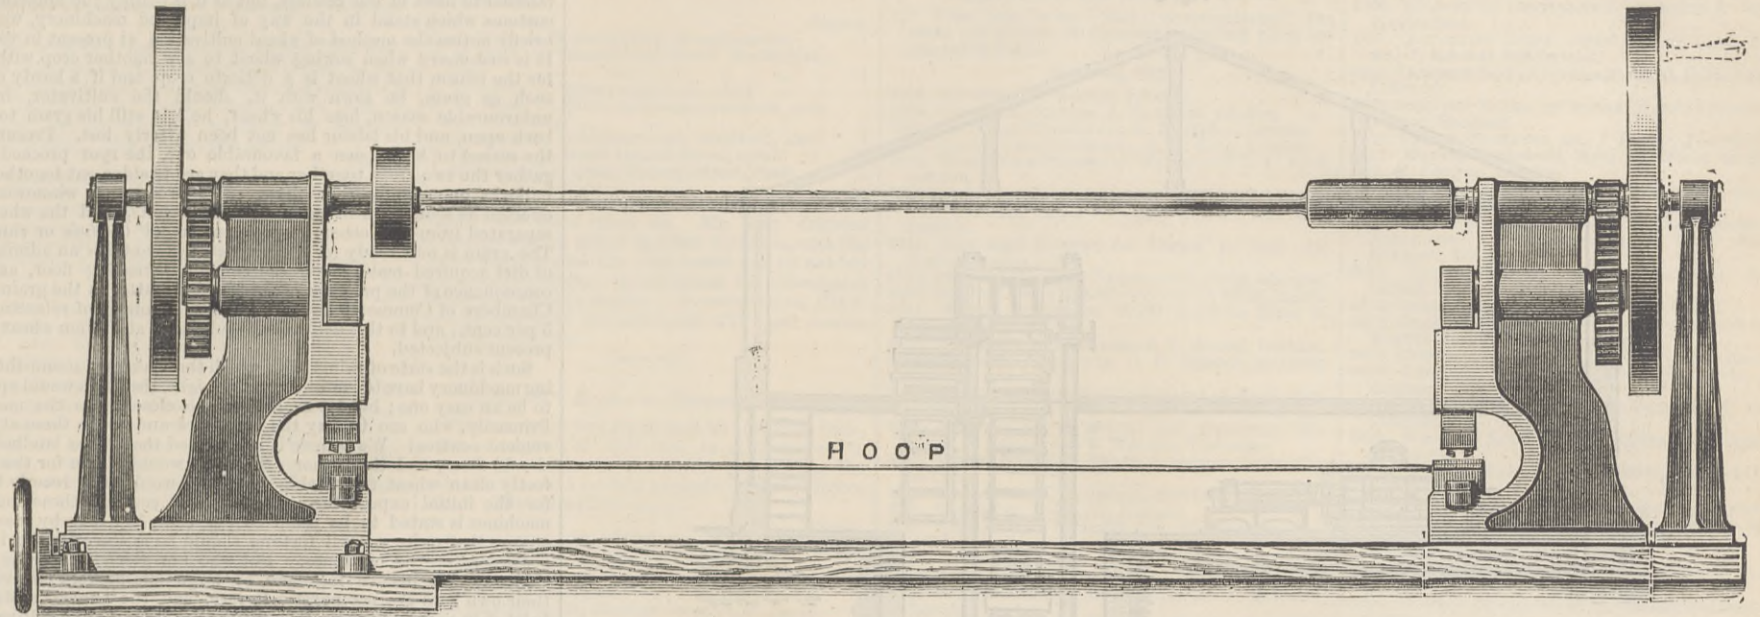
IMPROVED BALING HOOP PUNCHING MACHINE.
